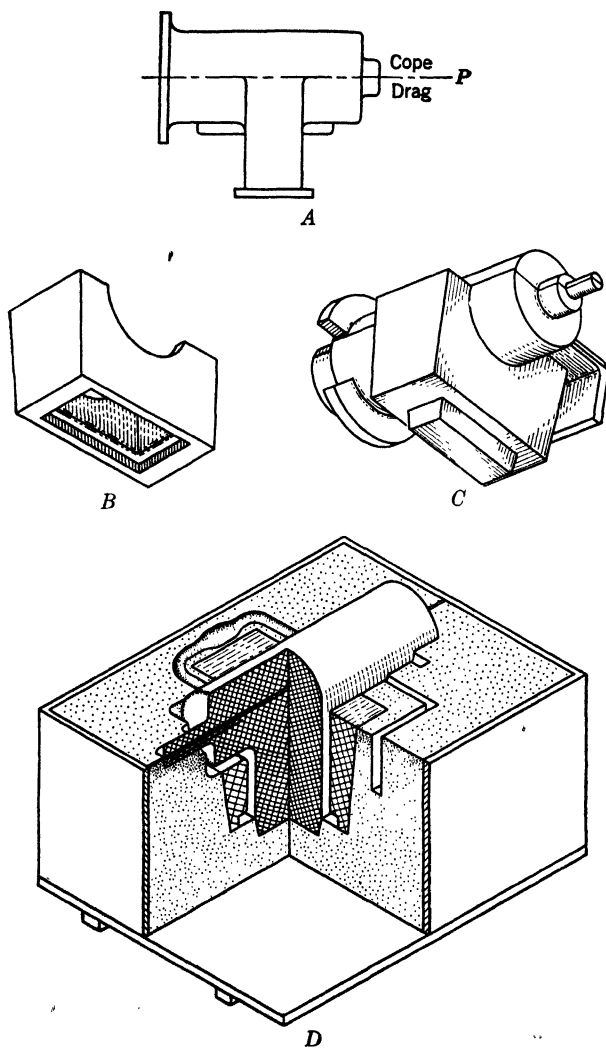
A. Parting plane. B. Core. C. Pattern. D. Sectional view of completed drag.
